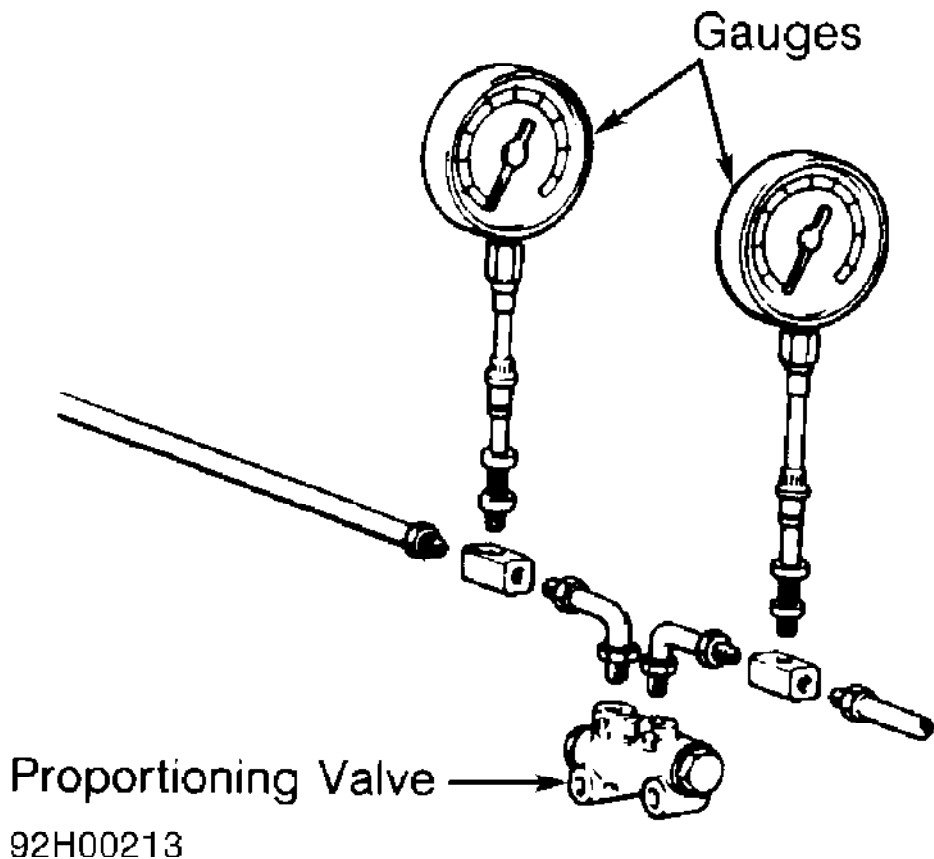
Connecting Pressure Gauges To Proportioning Valve (Typical)
